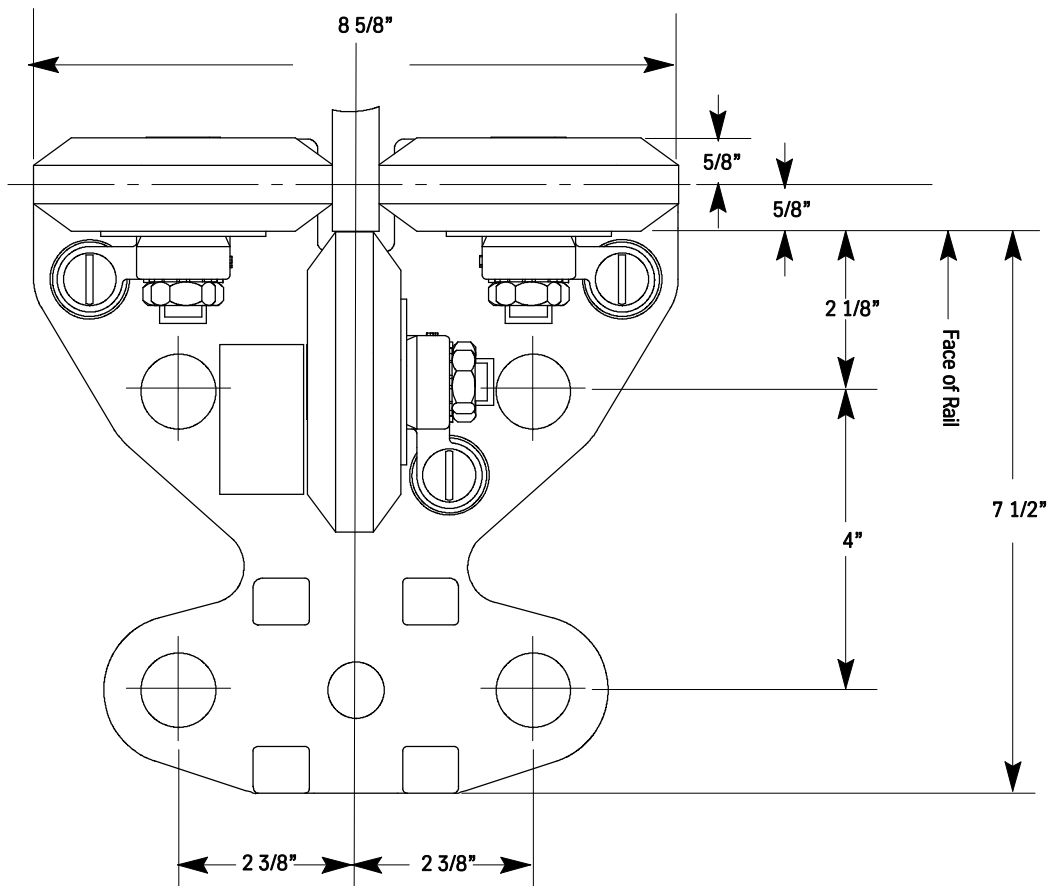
65150 and 63314 Roller Guide Assembly Load and Dimensional Data
